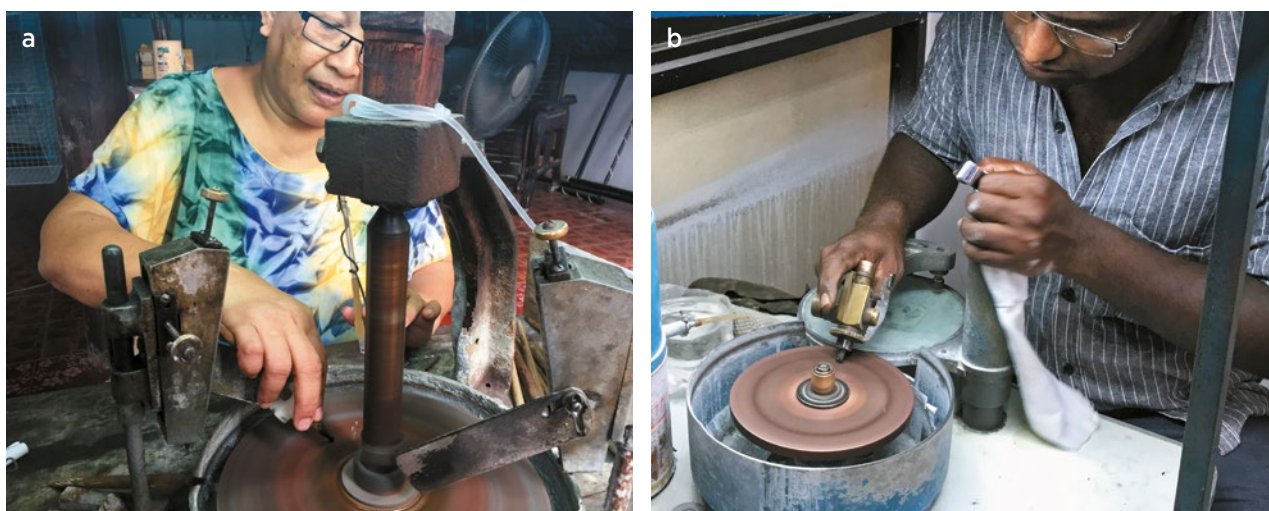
Thai jamb-peg-type cutting machine (a) is shown in comparison with a Sri Lankan Imahashi-style handpiece machine (b). Photos by J. Prim.
